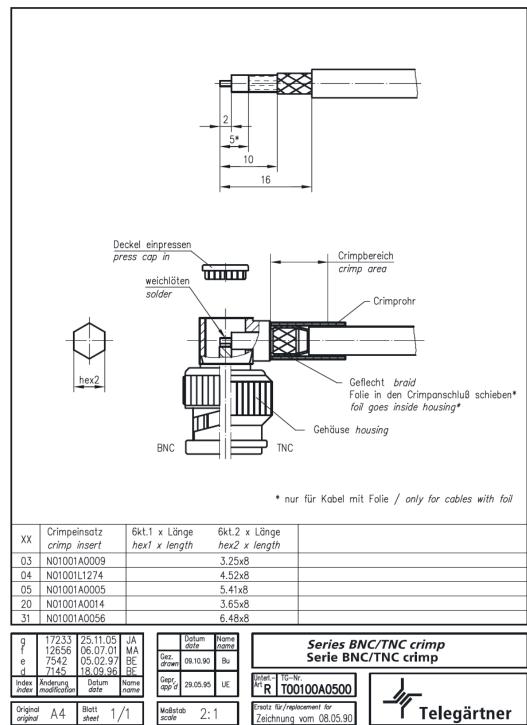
Assembly Instruction BNC, angled, SISO3 side
